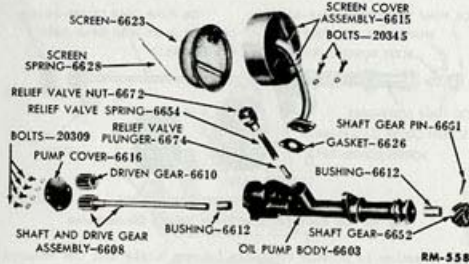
Oil Pump (With Relief Valve), Disassembled
